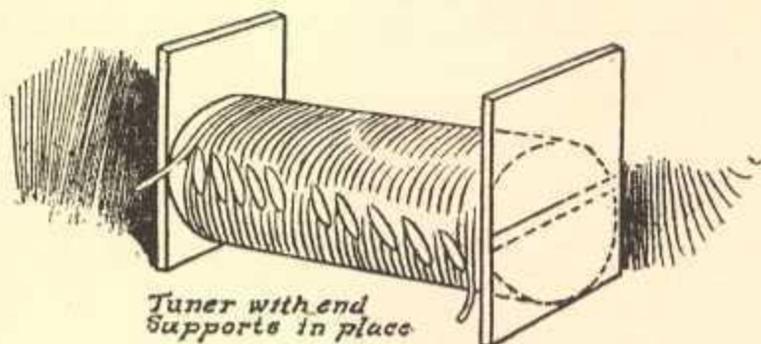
How to Fasten Ends to Oatmeal Box.
